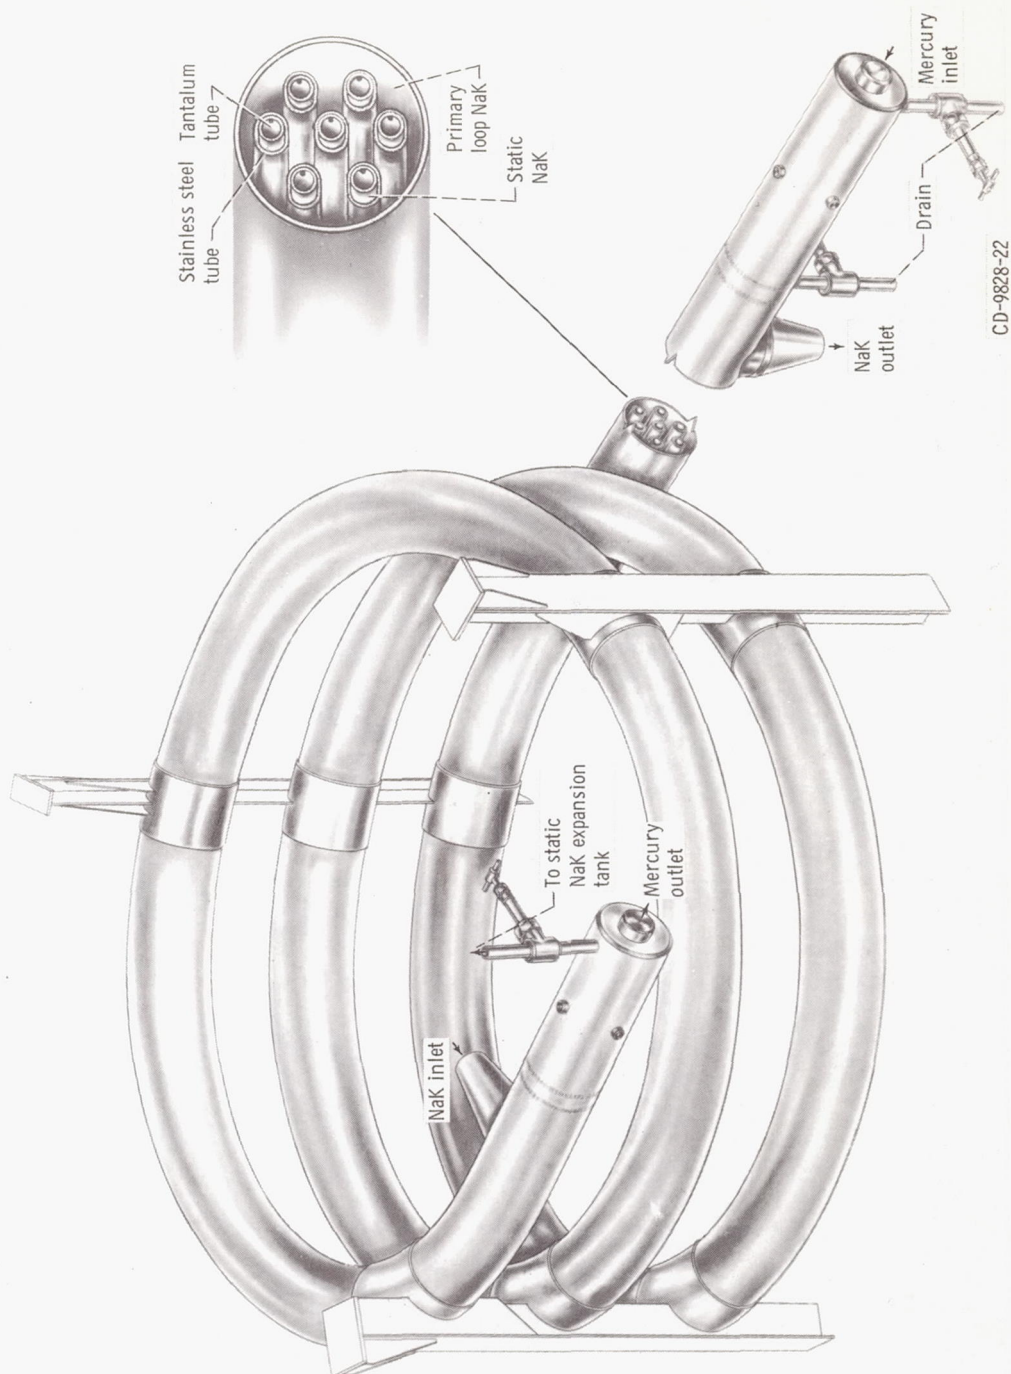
SNAP-8 double containment tantalum - stainless steel boiler.
